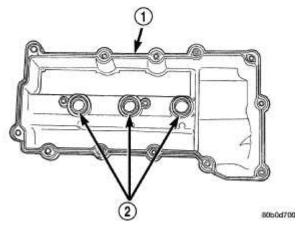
View Of Cylinder Head Cover Gasket and Spark Plug Seals Courtesy of CHRYSLER LLC
